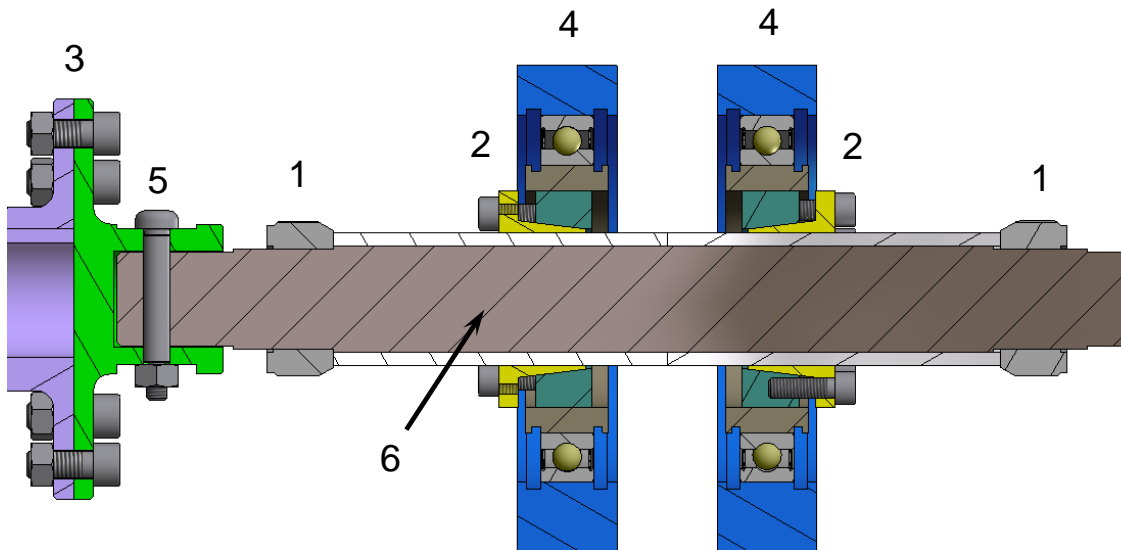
Sectioned view of the various components in the support and clamping system; the internal mandrel is clearly shown here. The various components are numbered and described in the paper.
